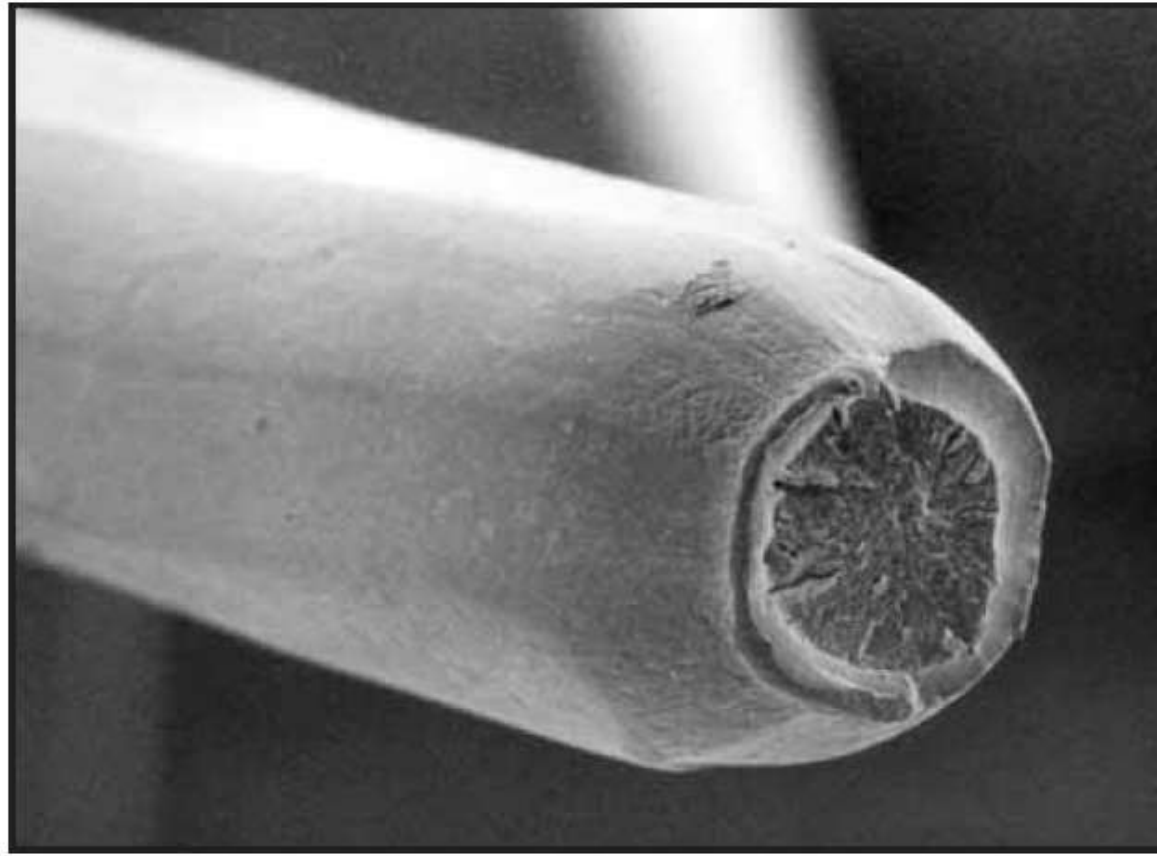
Classic cup and cone tensile failure. The diameter reduction at the fracture is clearly visible.
